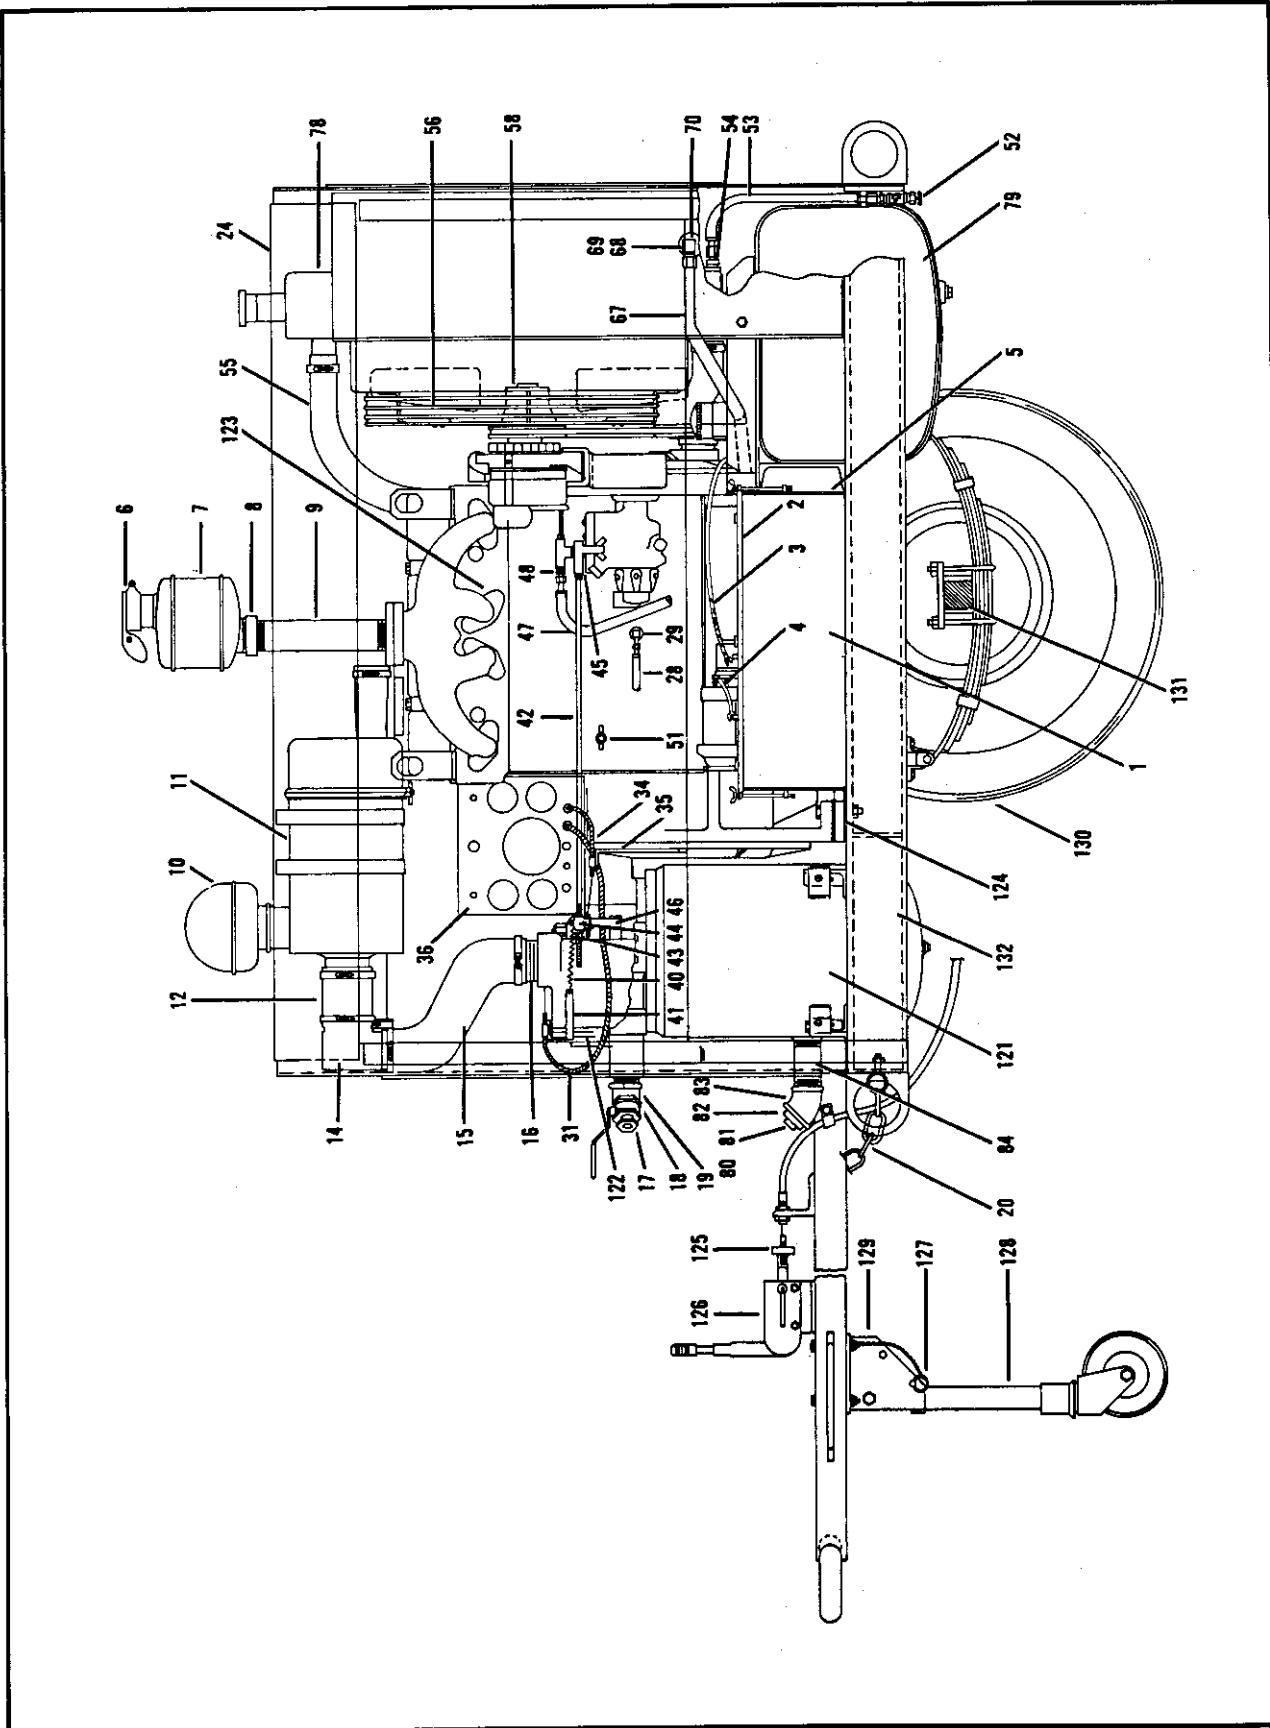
Compressor unit assembly, Model 4M125PVC (Sheet 1 of 4)
